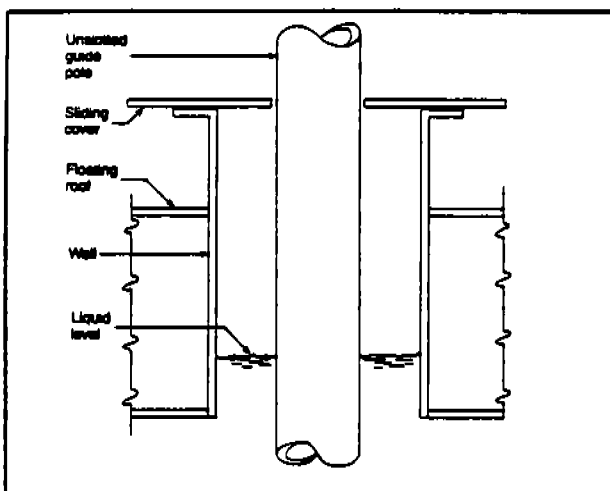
Roof fittings for external floating roof tanks.³
